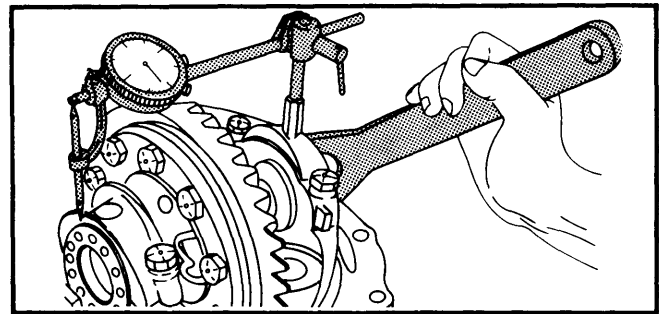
Using Dial Indicator to Adjust Side Bearing Preload
